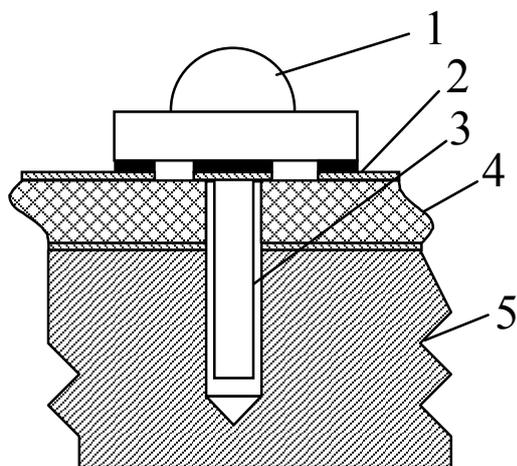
LED soldered on FR4 PCB with copper pin; 1 – LED; 2 – copper layer; 3 – copper pin; 4 – FR4 PCB; 5 – heat sink
